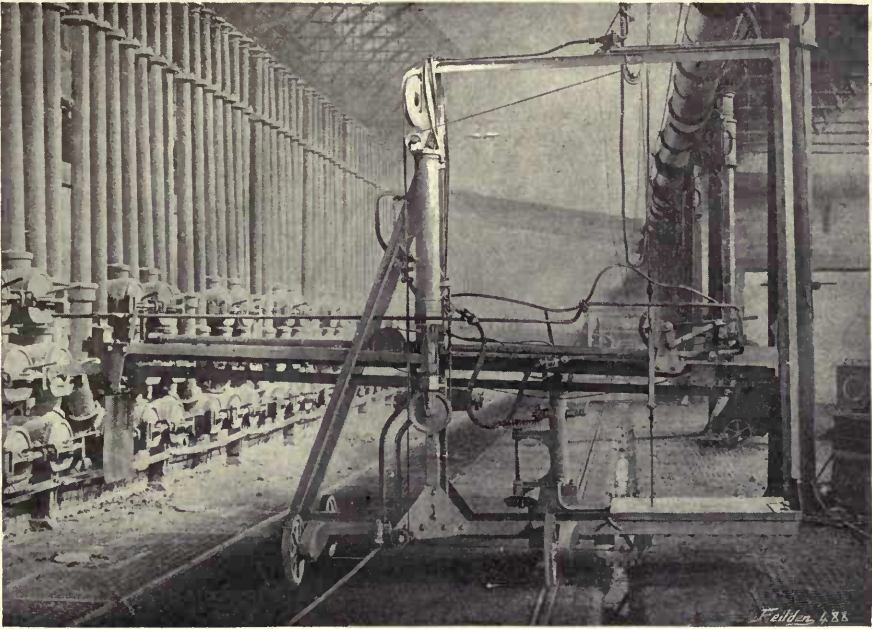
FOULIS-ARROL HYDRAULIC DRAWING MACHINE.
